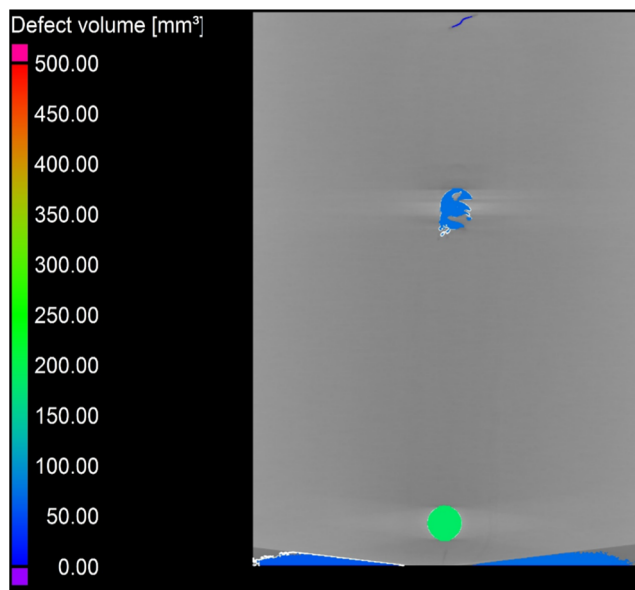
CT scan image of the weld sample showing the surface defects for sample 2
